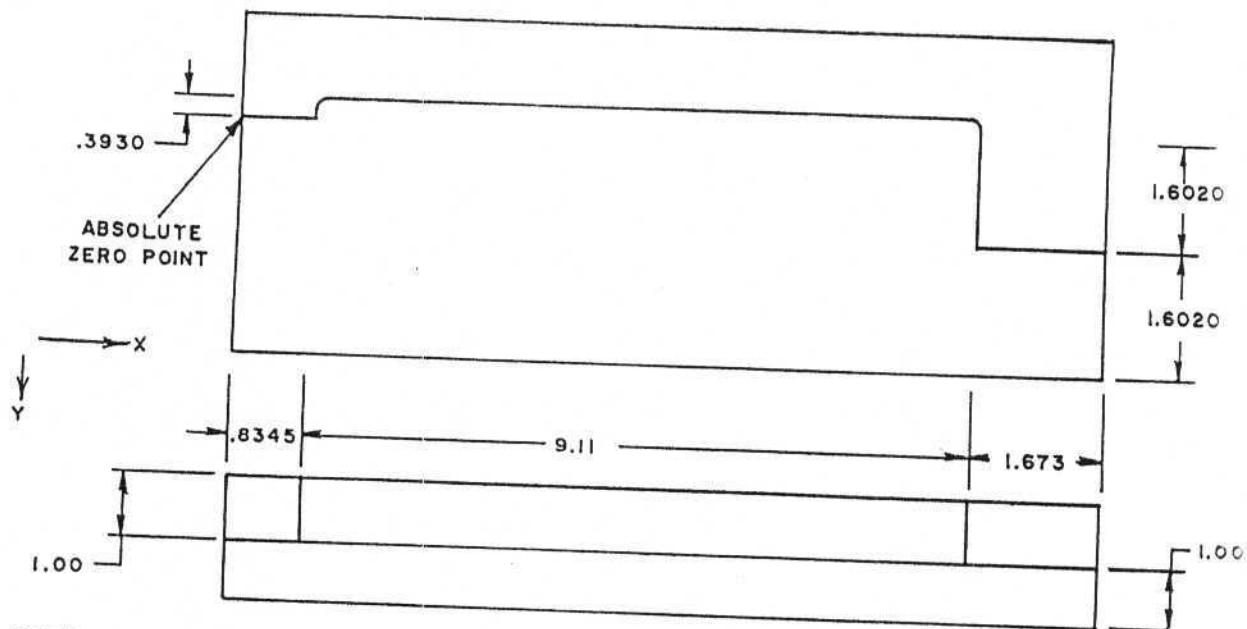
COMPONENT AND DIMENSIONS USED IN EXAMPLE 5
